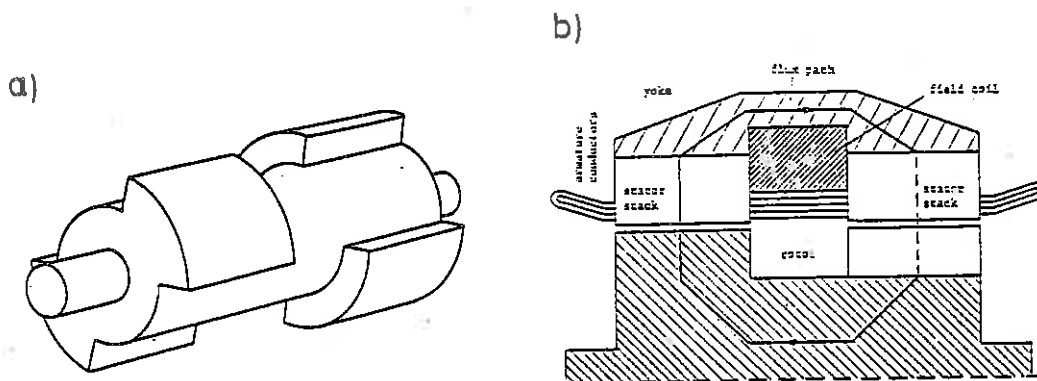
Homopolar synchronous motor : a) rotor, b) coaxial cross section
